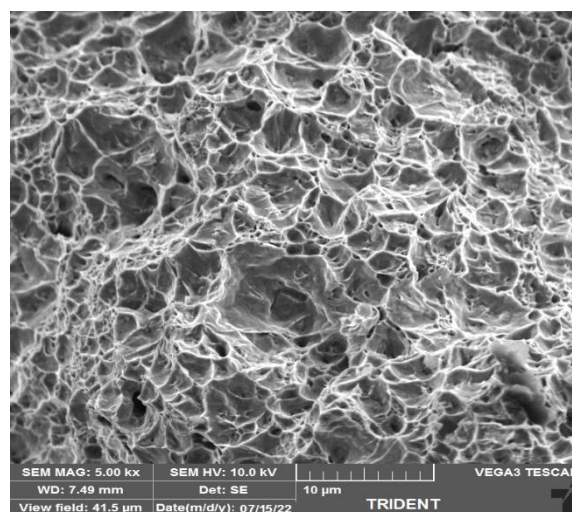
Fracture morphology of failed LH74 weldment after tension test.
